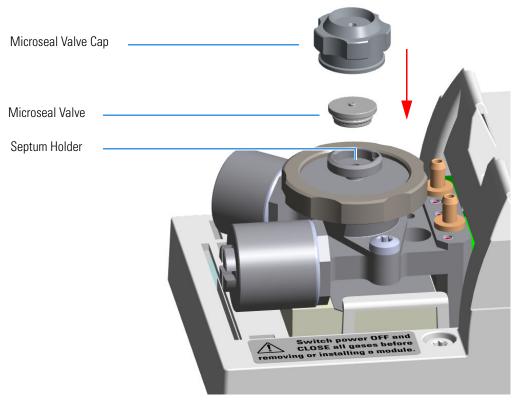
SSL/SSLBKF and HeS-S/SL Injector: Microseal Valve Installation
